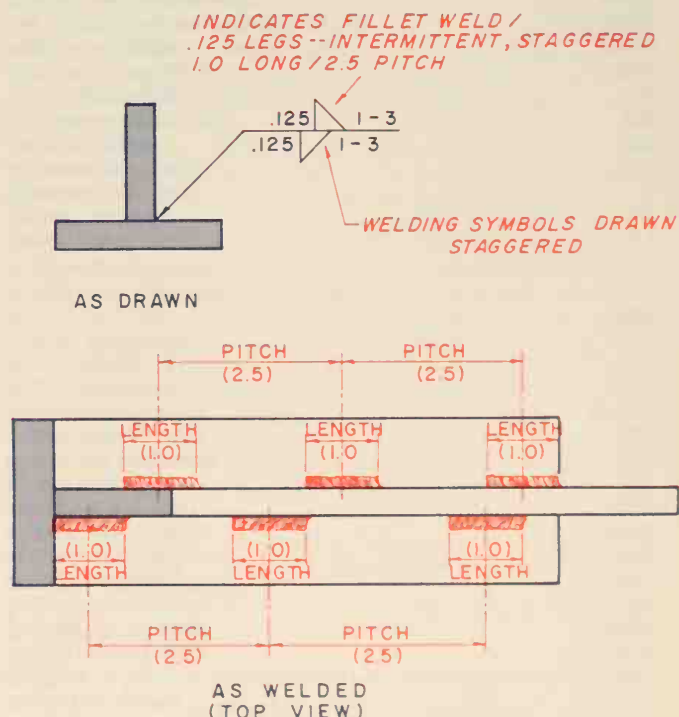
Pitch is the center-to-center distance between welds
